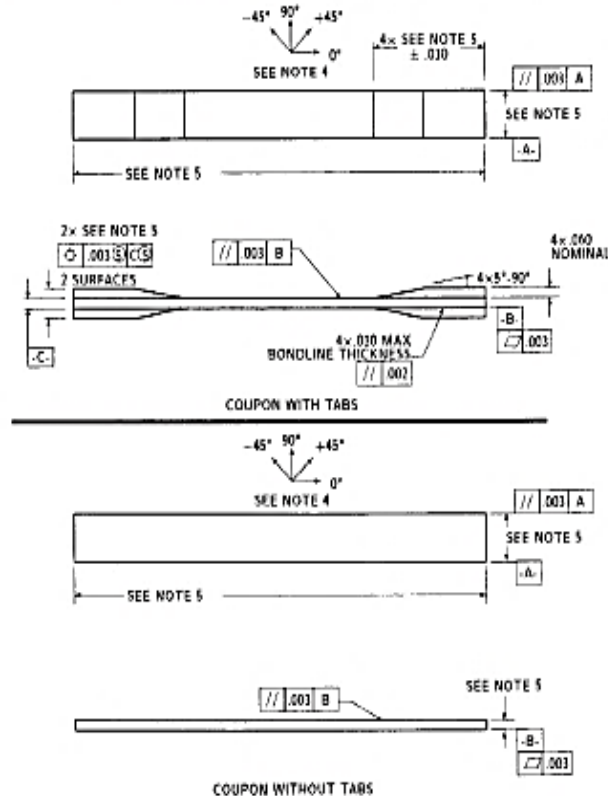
Tension Test Specimen Drawing (inch-pound)
